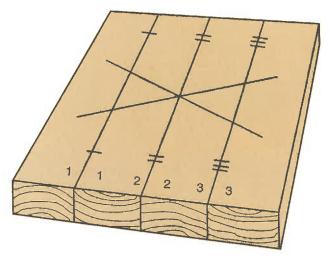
Lightly mark workpieces with a pencil to identify mating joints.
